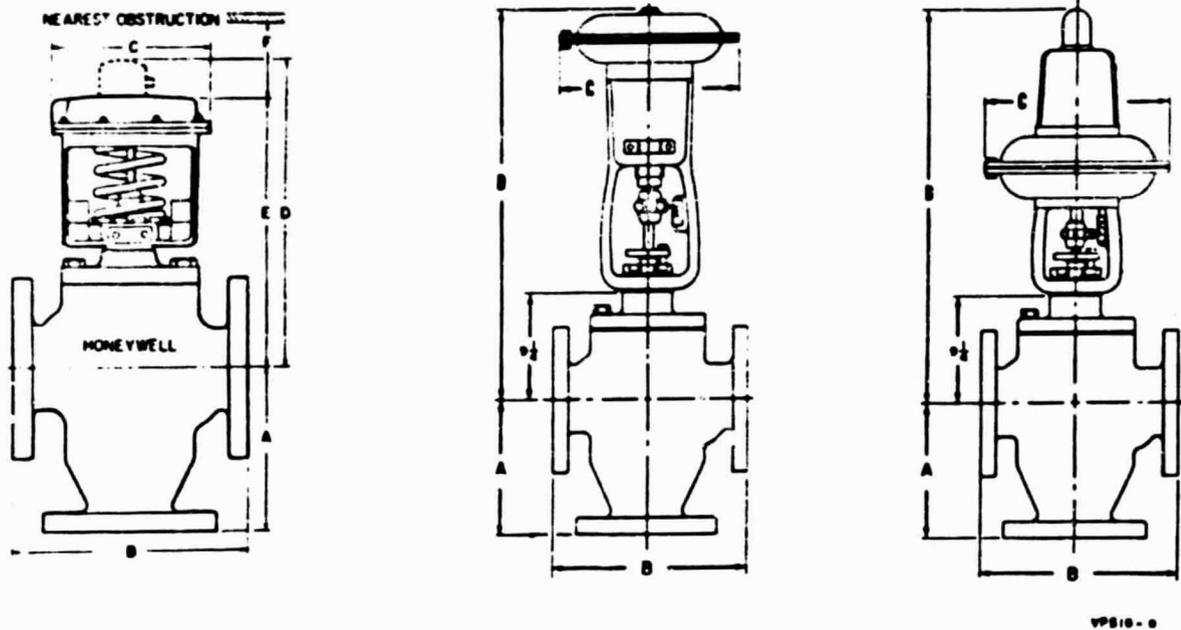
Dimensions: 2-1/2 thru 6 in.—left; 8 in. Direct Acting—center; 8 in. Reverse Acting—right.
